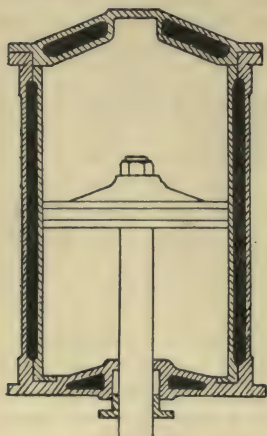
Section of a cylinder, steam-jacketed at the parts shown black.
